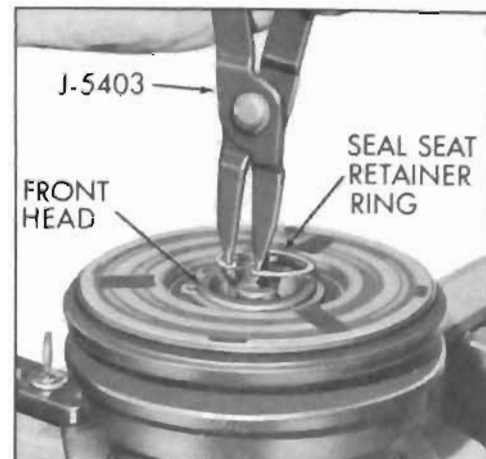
Removing or Installing Shaft Seal Seat Retaining Ring
